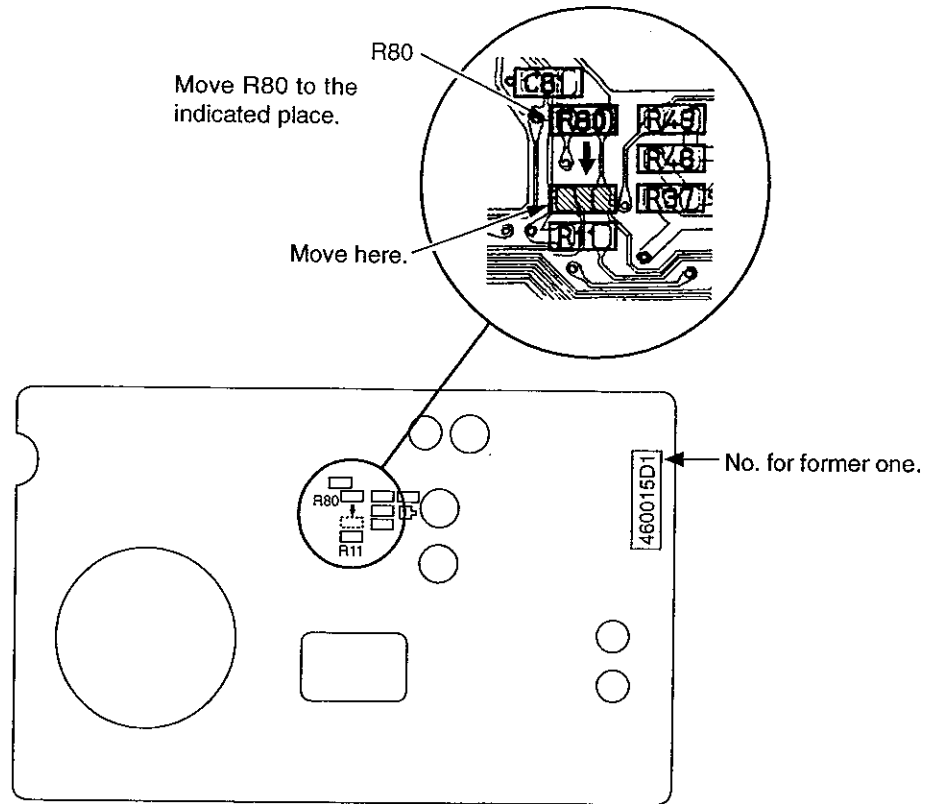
Modification on Former Mechanism P.C.B. Ass'y (M3)
